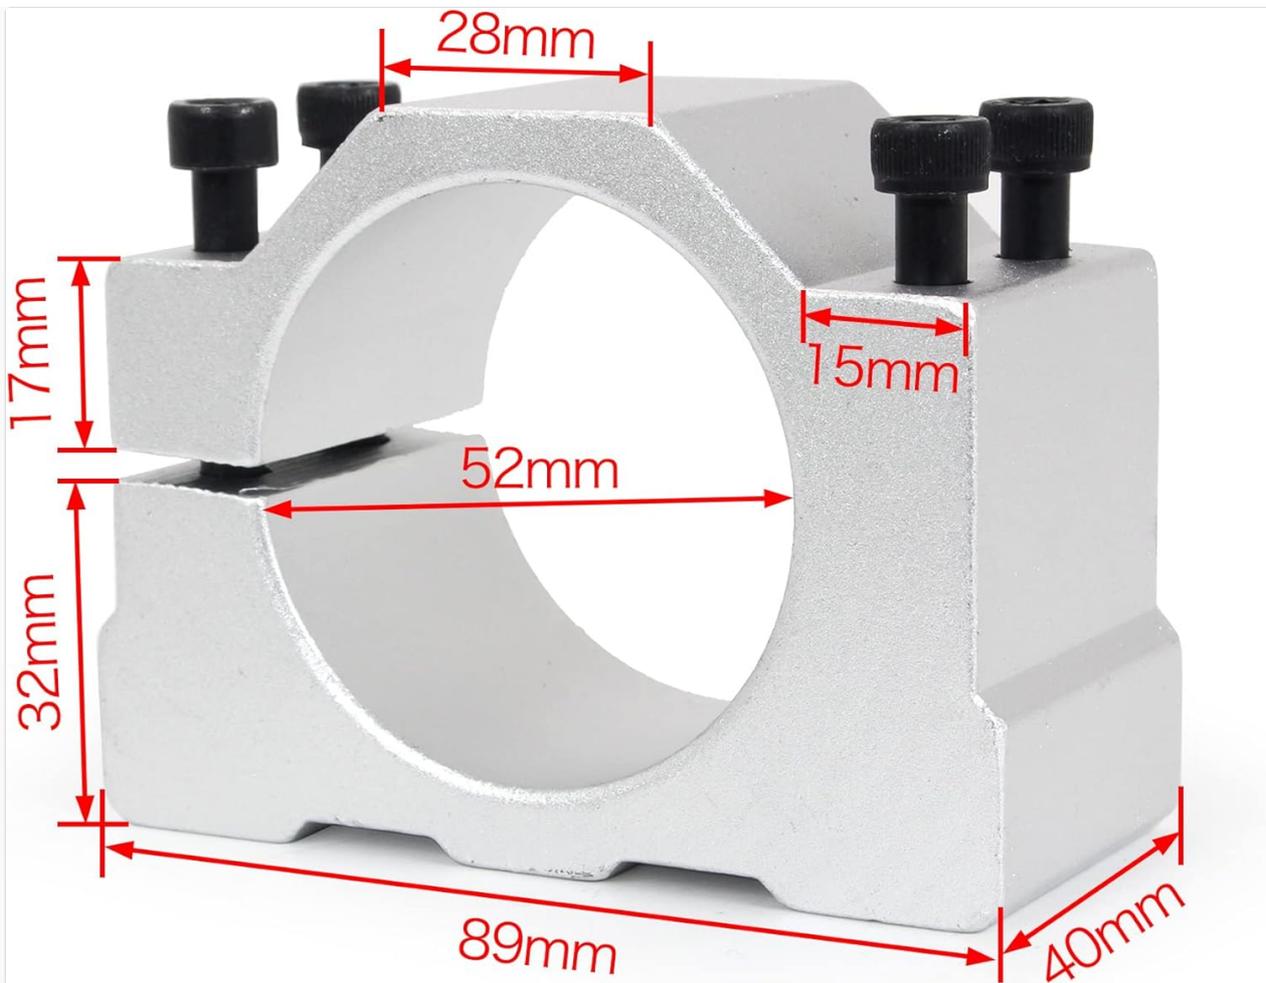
Dimensional drawing of the 52mm spindle mount clamp, indicating its size and mounting points.
